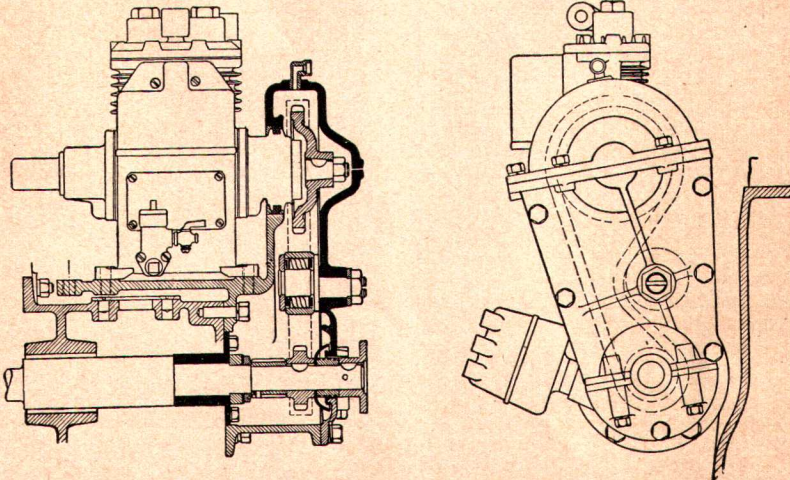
Diagram of Chain Drive Air Compressor Mounting of Early Design; Later Designs Have No Idler.
